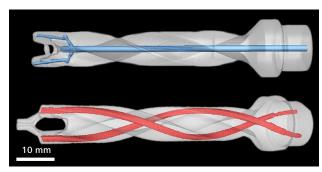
CT images of steel drills with cooling channels; top: conventionally produced with later machined cooling channels; bottom: additively manufactured with curved cooling channels (red).
